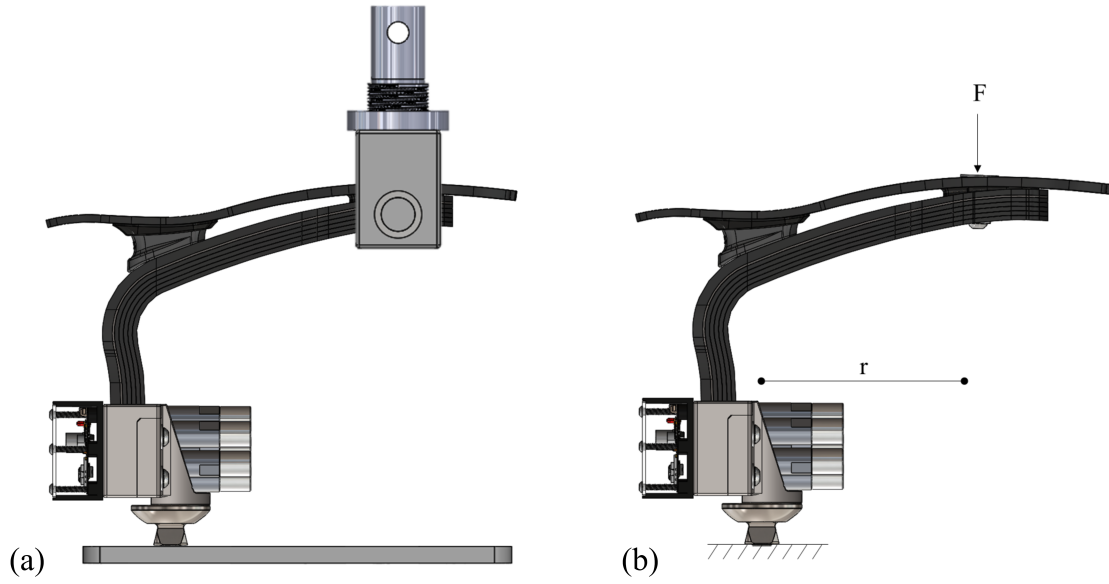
Test fixture design. Prosthesis testing test fixture is designed to isolate moment loads from the load cell in order to minimize measurement errors.
